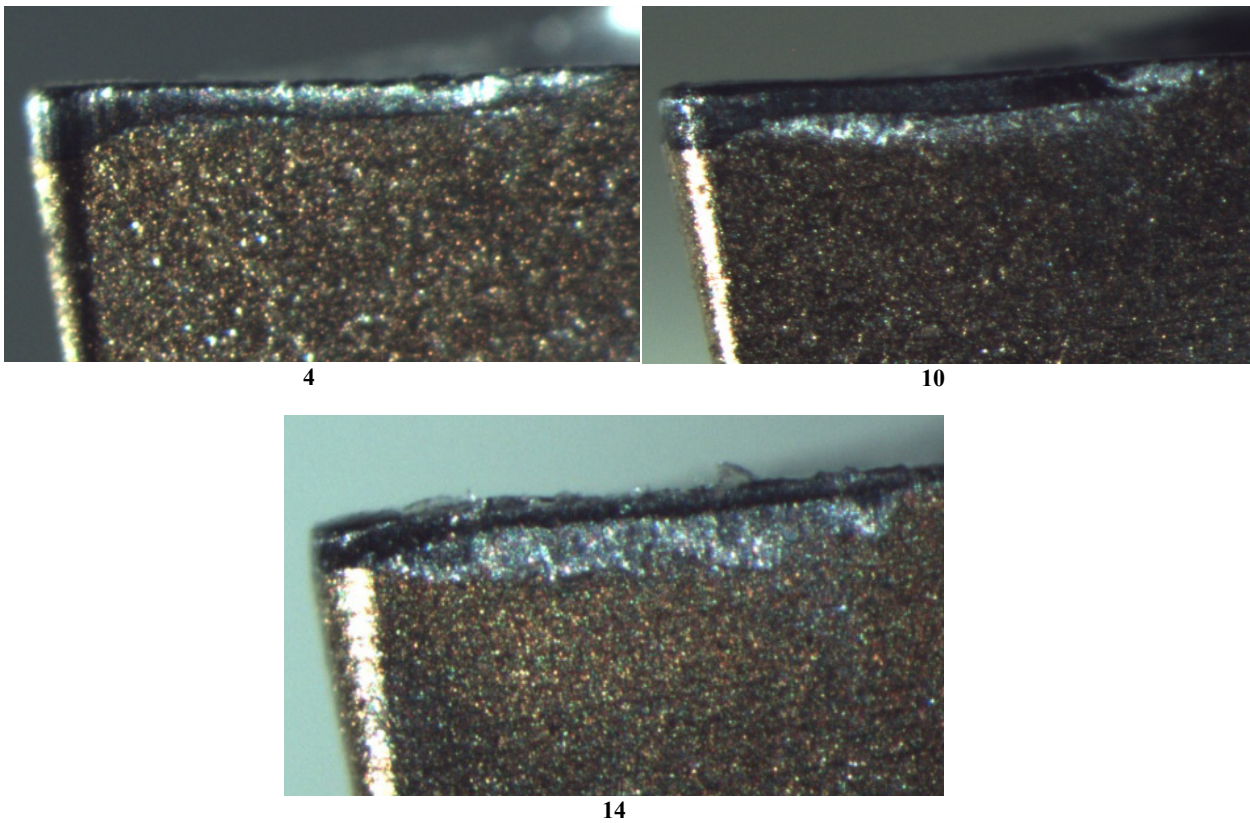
Cutting plates after machining of alloy samples with 0,1 % Ti (sample No. 4, 10, 14)
